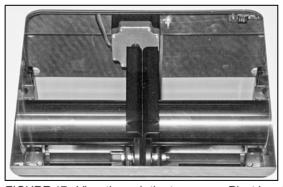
View through the top cover. Pivot bearings are not visible.
